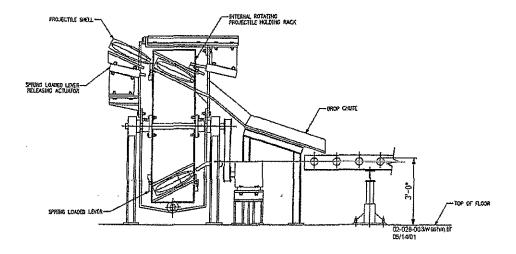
Figure Attachment D-1-5. Projectile (Rotary) Washout Machine
